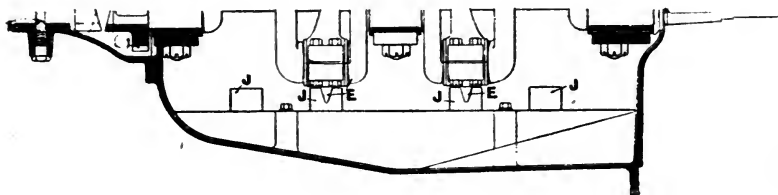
SECTION OF OIL SUMP OF CRANK CHAMBER.
